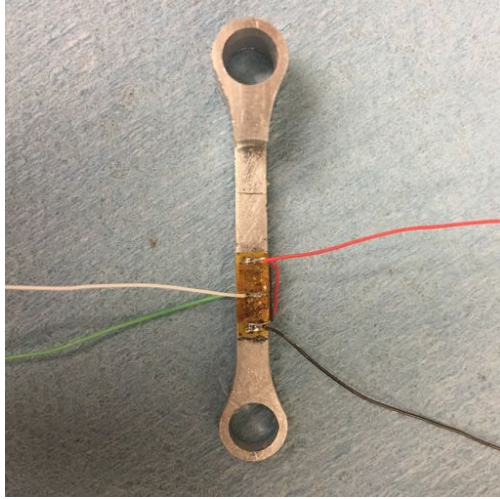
Instrumented pitch link, with full Wheatstone bridge strain gauge configuration
